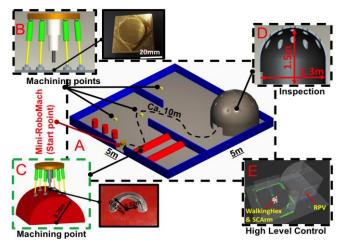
A working scenario for Mini-RoboMach system: part of a nuclear power plant (A); machining on the flats (B) and on pipes (B) and inspection of welds (D) utilising a high level controller (E)
